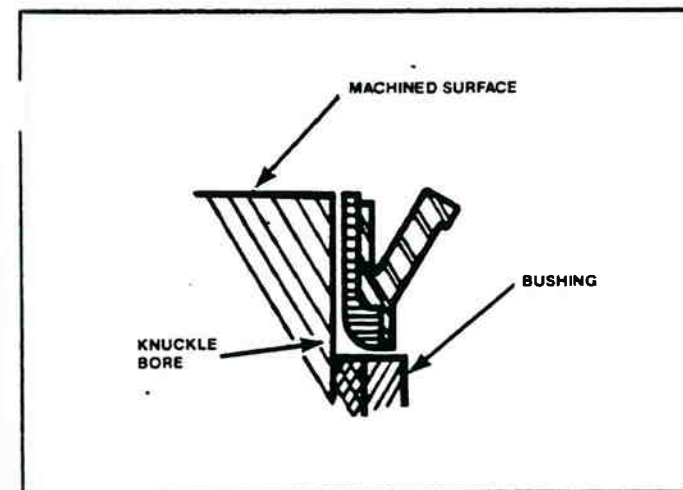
Grease Seal Installed in Knuckle With "Easy Steer" Bushings.
